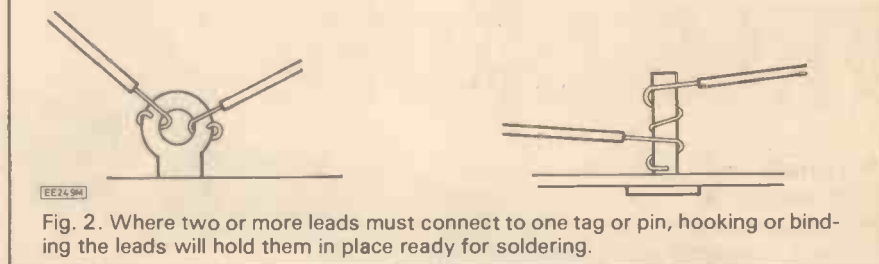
Where two or more leads must connect to one tag or pin, hooking or binding the leads will hold them in place ready for soldering.
